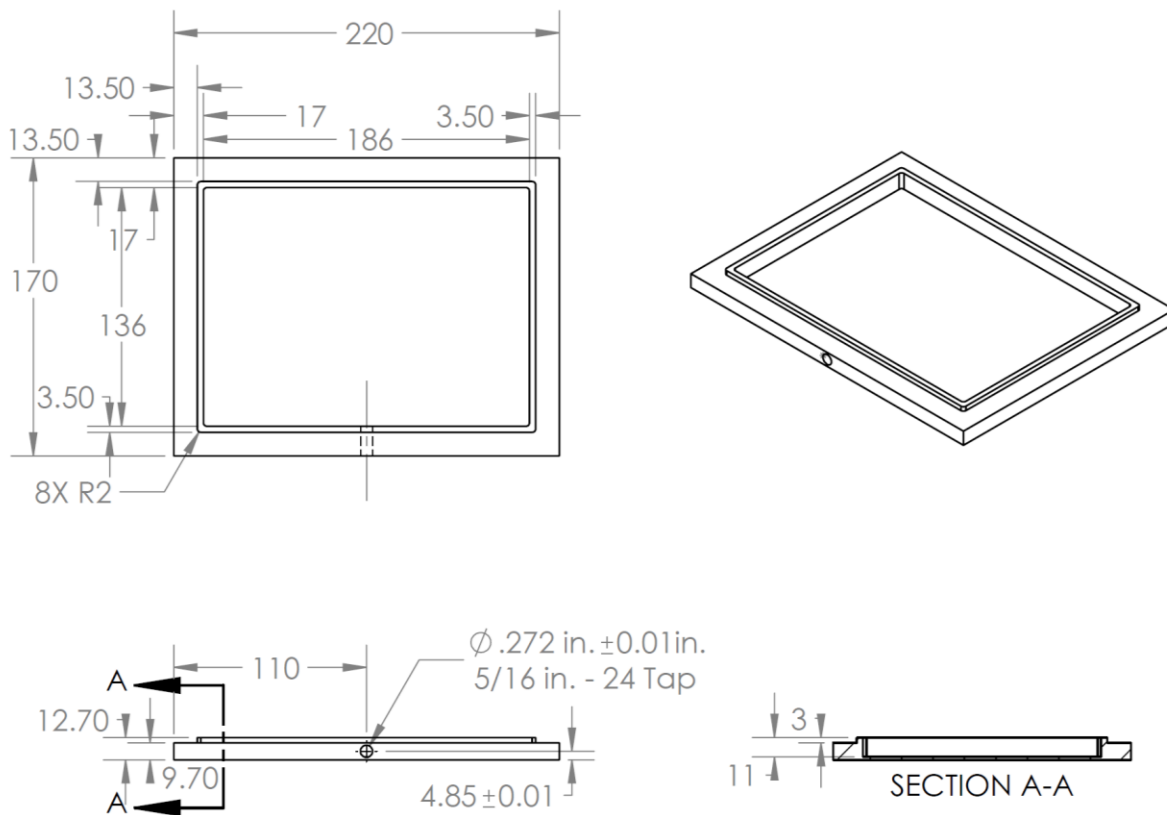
The bead die for our final design. All dimensions are in mm with a tolerance of 0.1 mm unless other specified.
